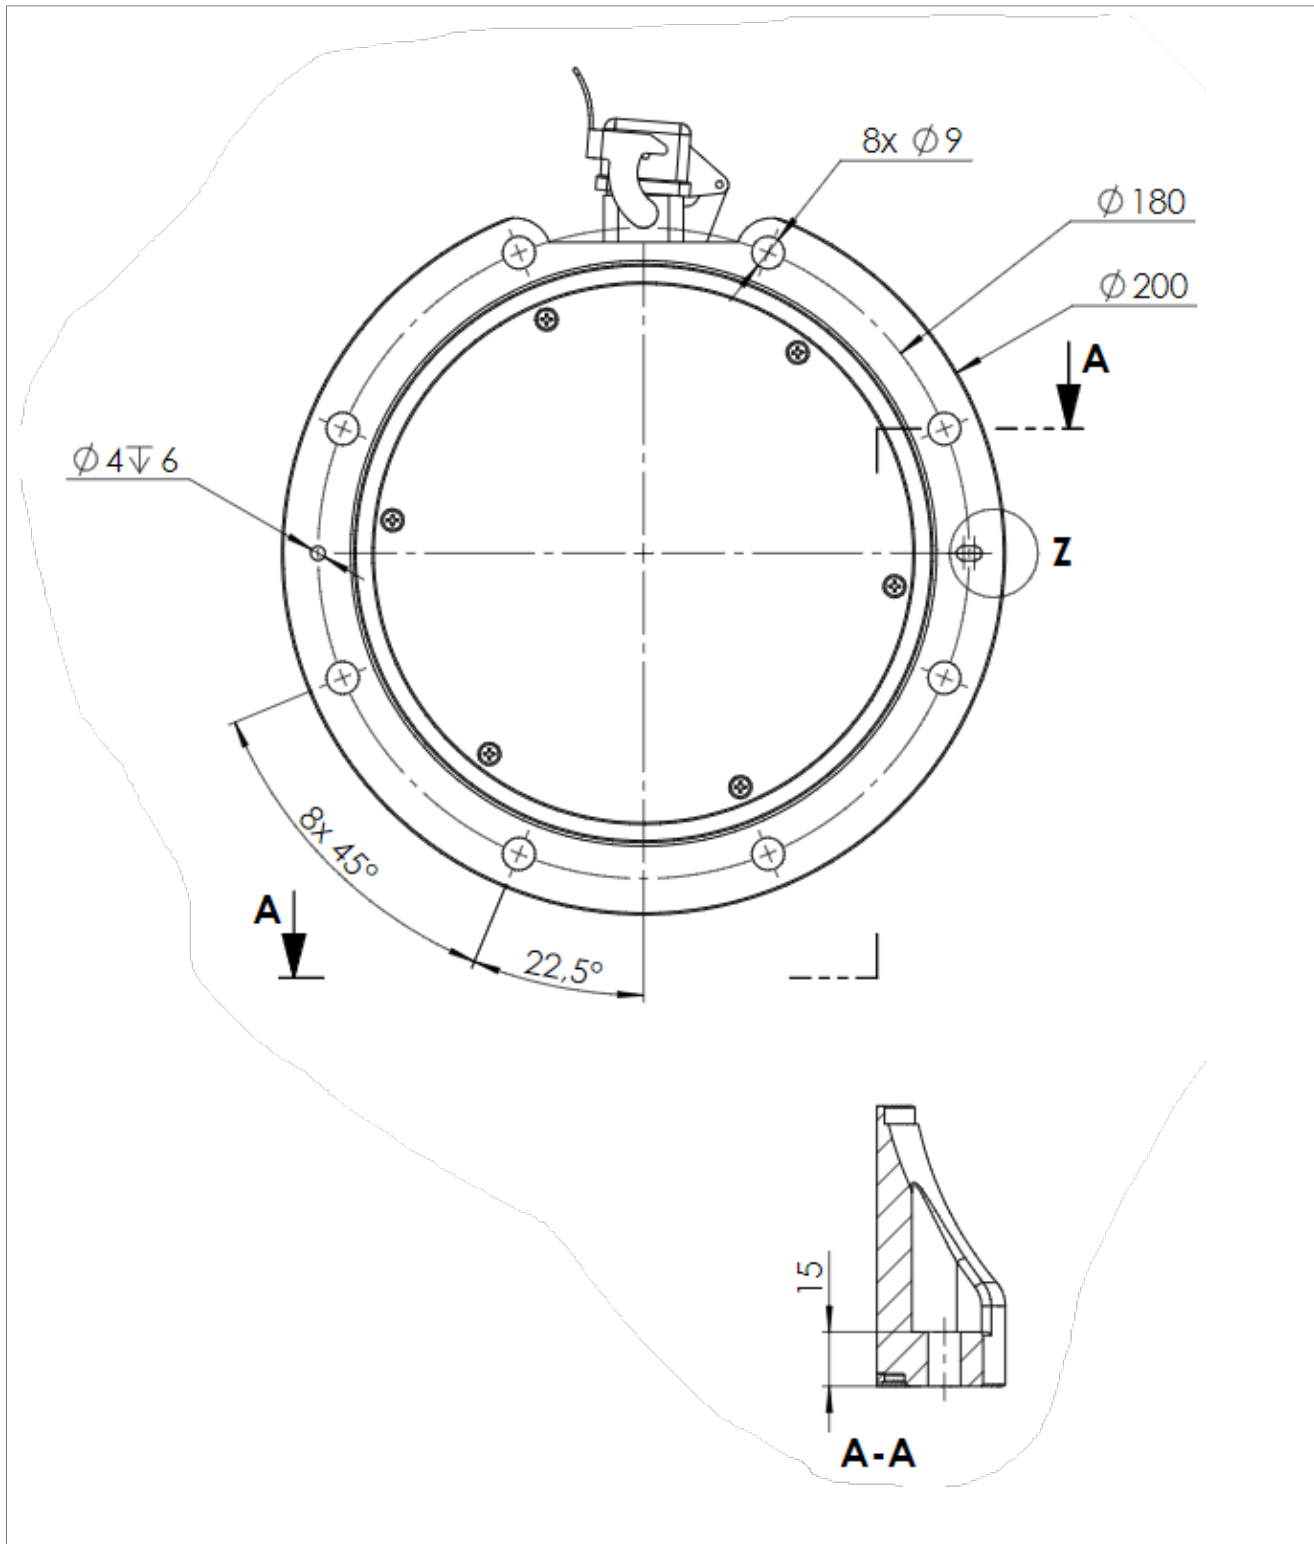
Installation dimensions of robot base (V1 until Sept. 2023) – CL108/CL110
